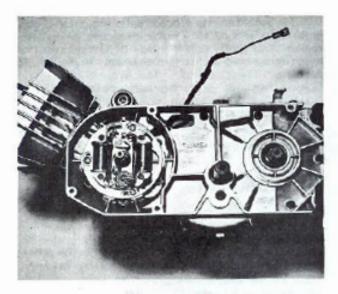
Mount the coils and points holder plate on the crankcase using the three screws. Mount the woodruff key in its slot with the woodruff key, slide the flywheel into place on the crankshaft.
